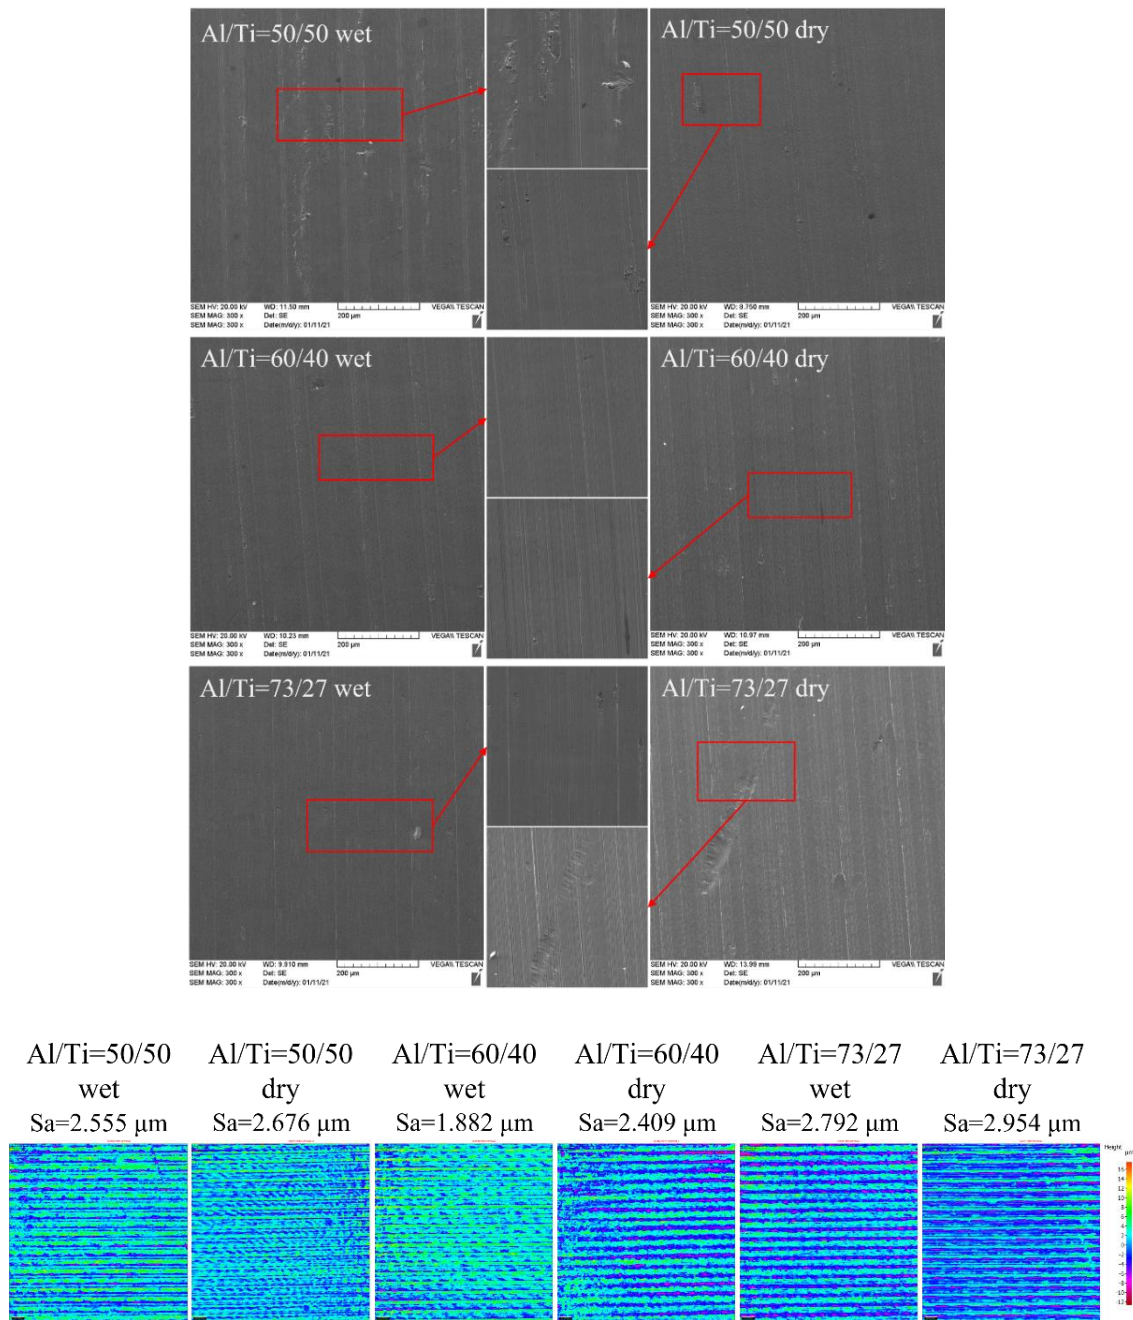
Surface integrity results of SS304 cut with AlTiN coated inserts (Al/Ti = 50/50, 60/40, and 73/27) under wet and dry conditions.
